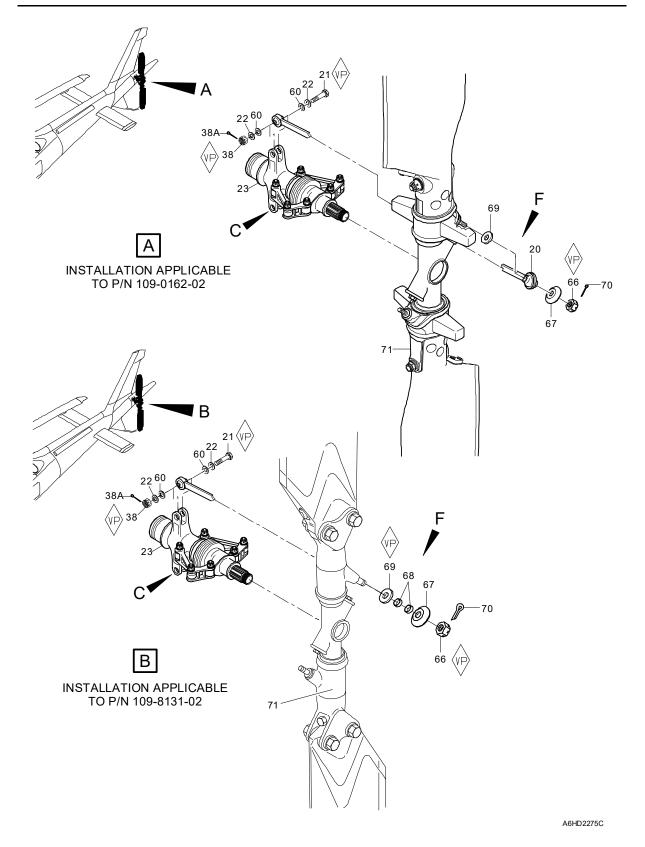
(sheet 1 of 5). Pitch change mechanism (Sleeve assy P/N 109G6430A03)
